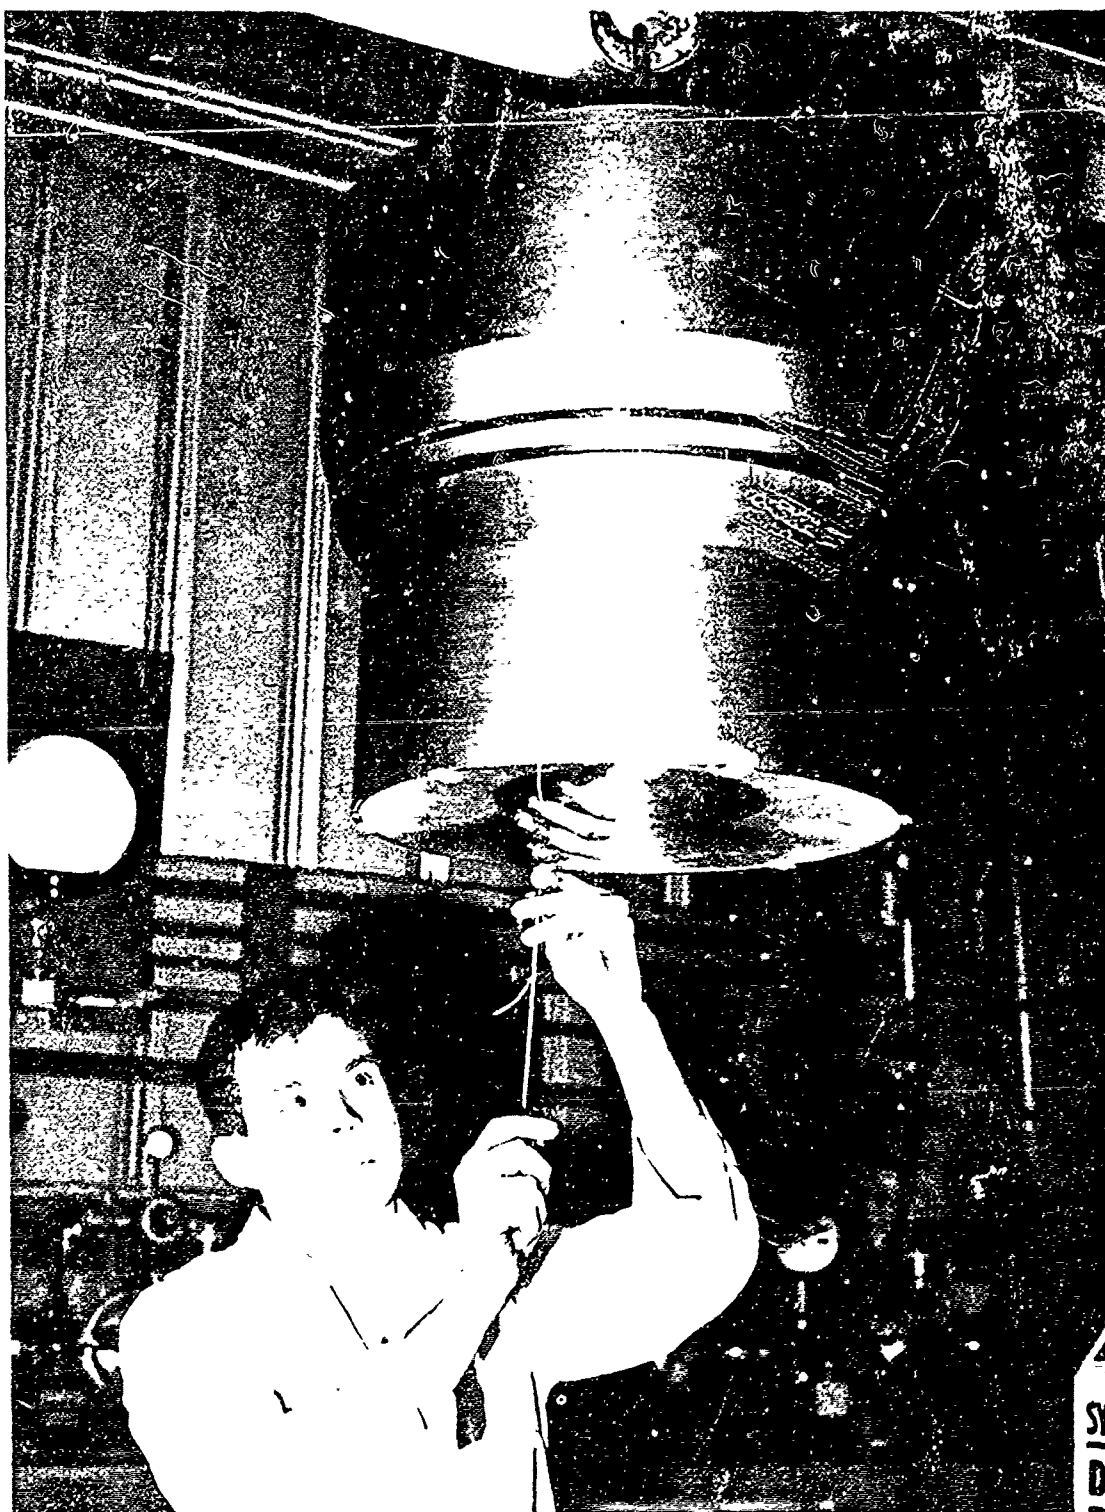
End closure assembly for 18-inch-inside-diameter pressure vessel, with 8-inch-diameter, 90° conical acrylic window being secured in mounting flange.
